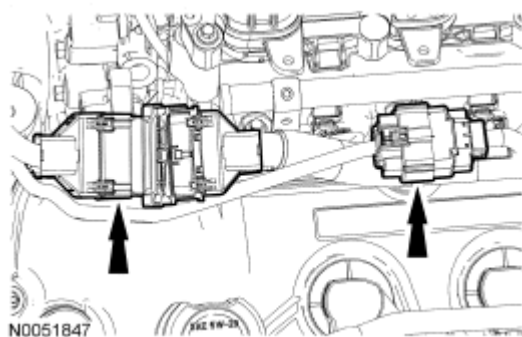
Identifying Engine Wiring Harness Electrical Connectors
